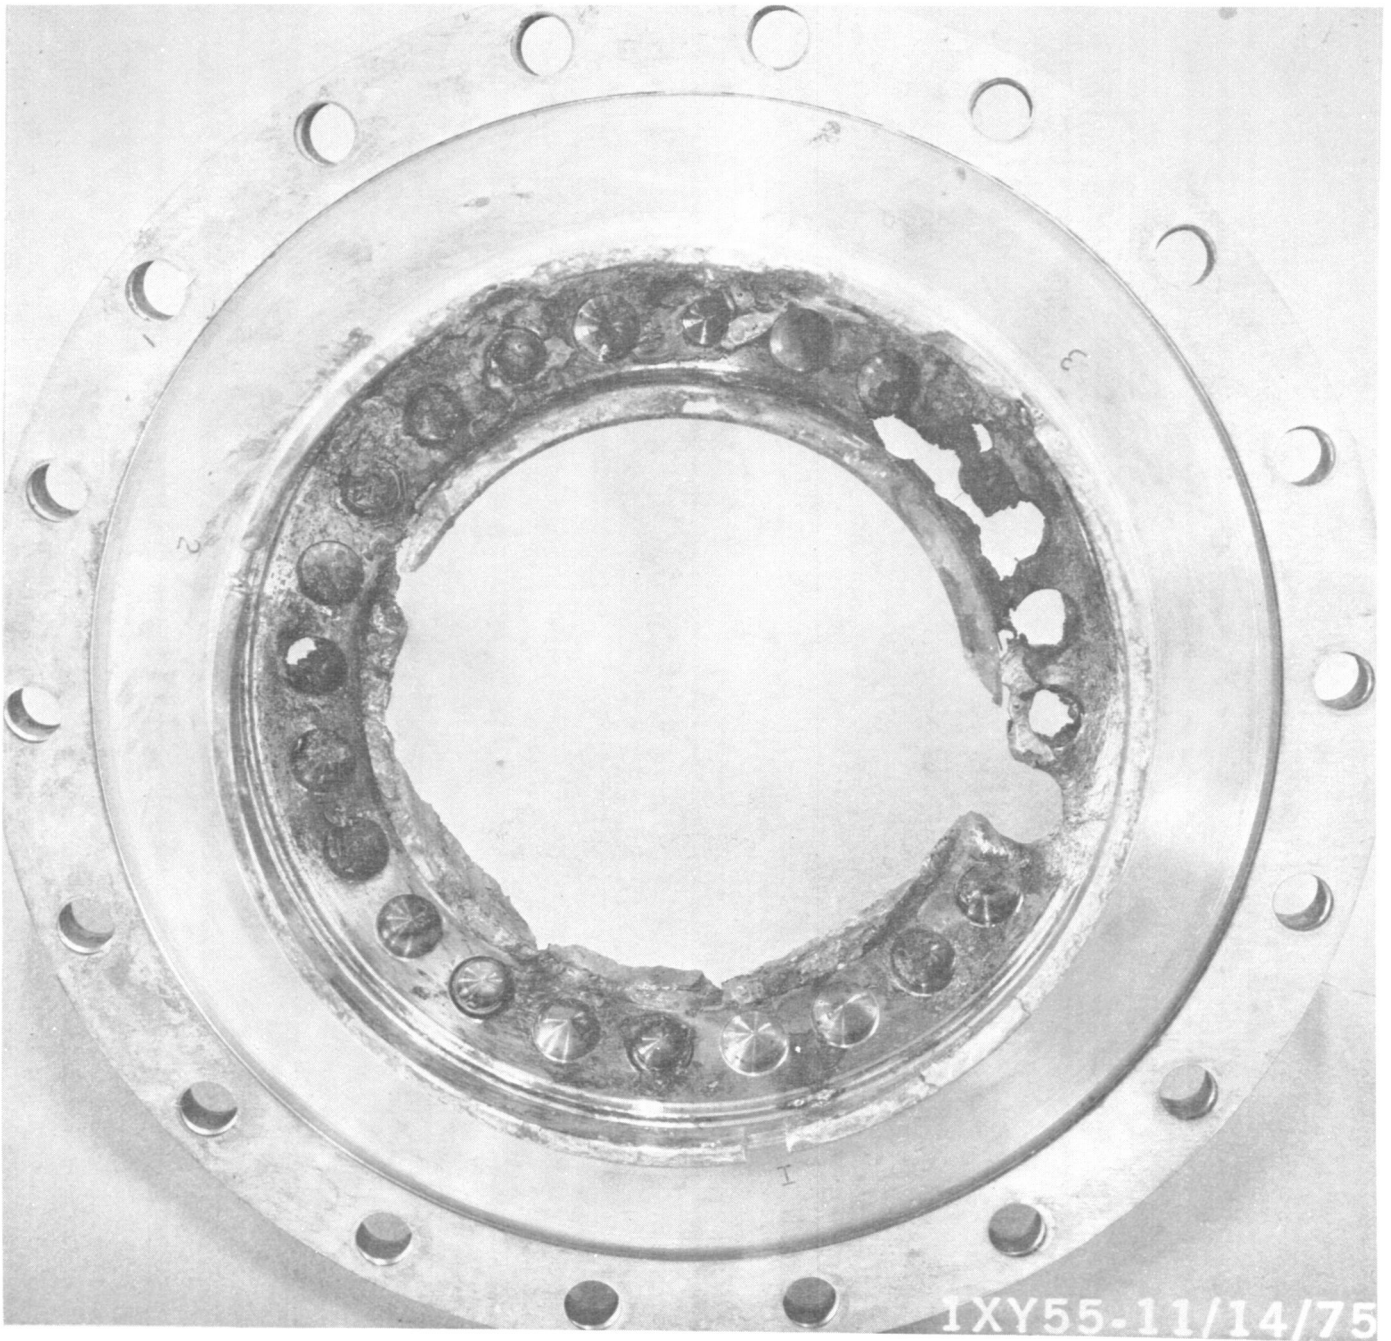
Posttest 222 Fire Showing LOX Seal Housing Upstream Side
